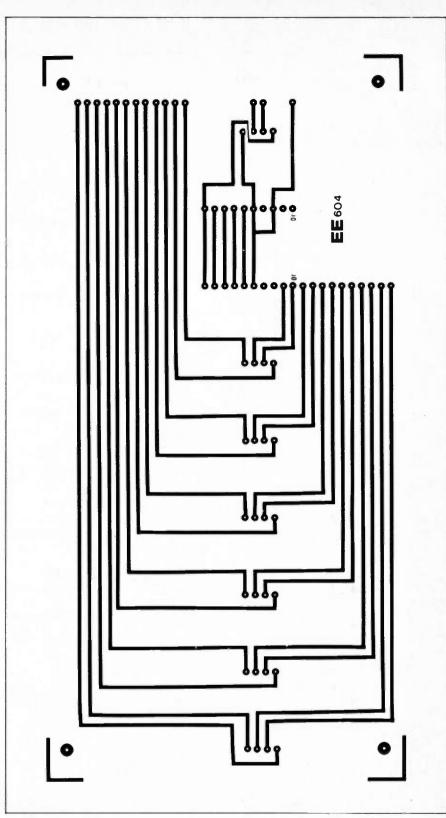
The full size printed circuit copper foil master pattern for the Mother board. See Fig. 15 for topside layout
